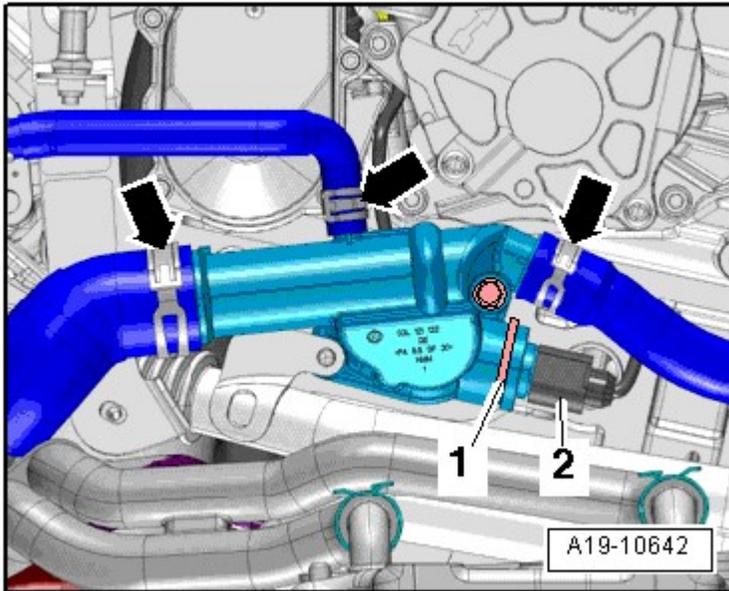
Identifying Engine Coolant Temperature Sensor -G62- -2- Connector And Hose Clamps
